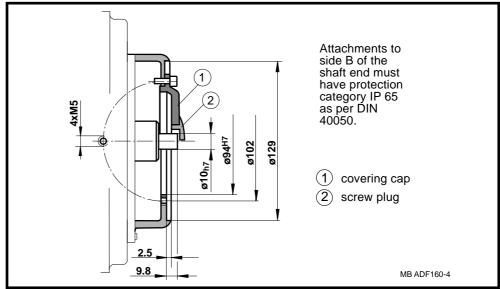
Main spindle motor ADF 160 - side B shaft end or shaft extension (with high-resolution motor feedback type 3 only)
